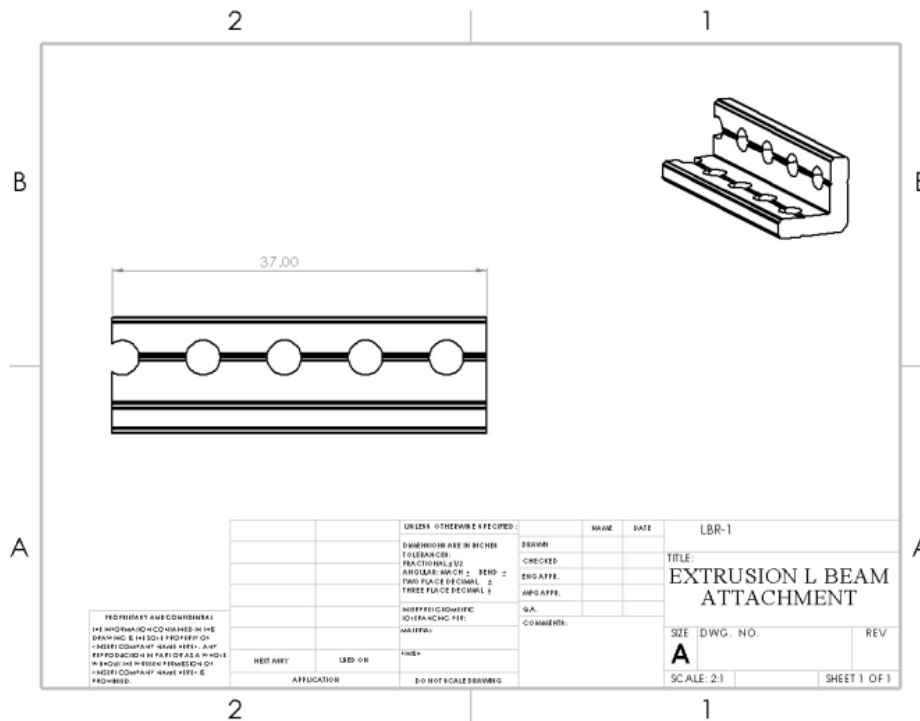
Part drawing of the modified L-beam connecting the lifting and climbing mechanism to the base plate.
